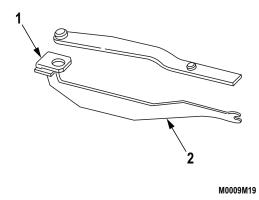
Primary Drive Lever and Vertical Cam Assembly Removal.
